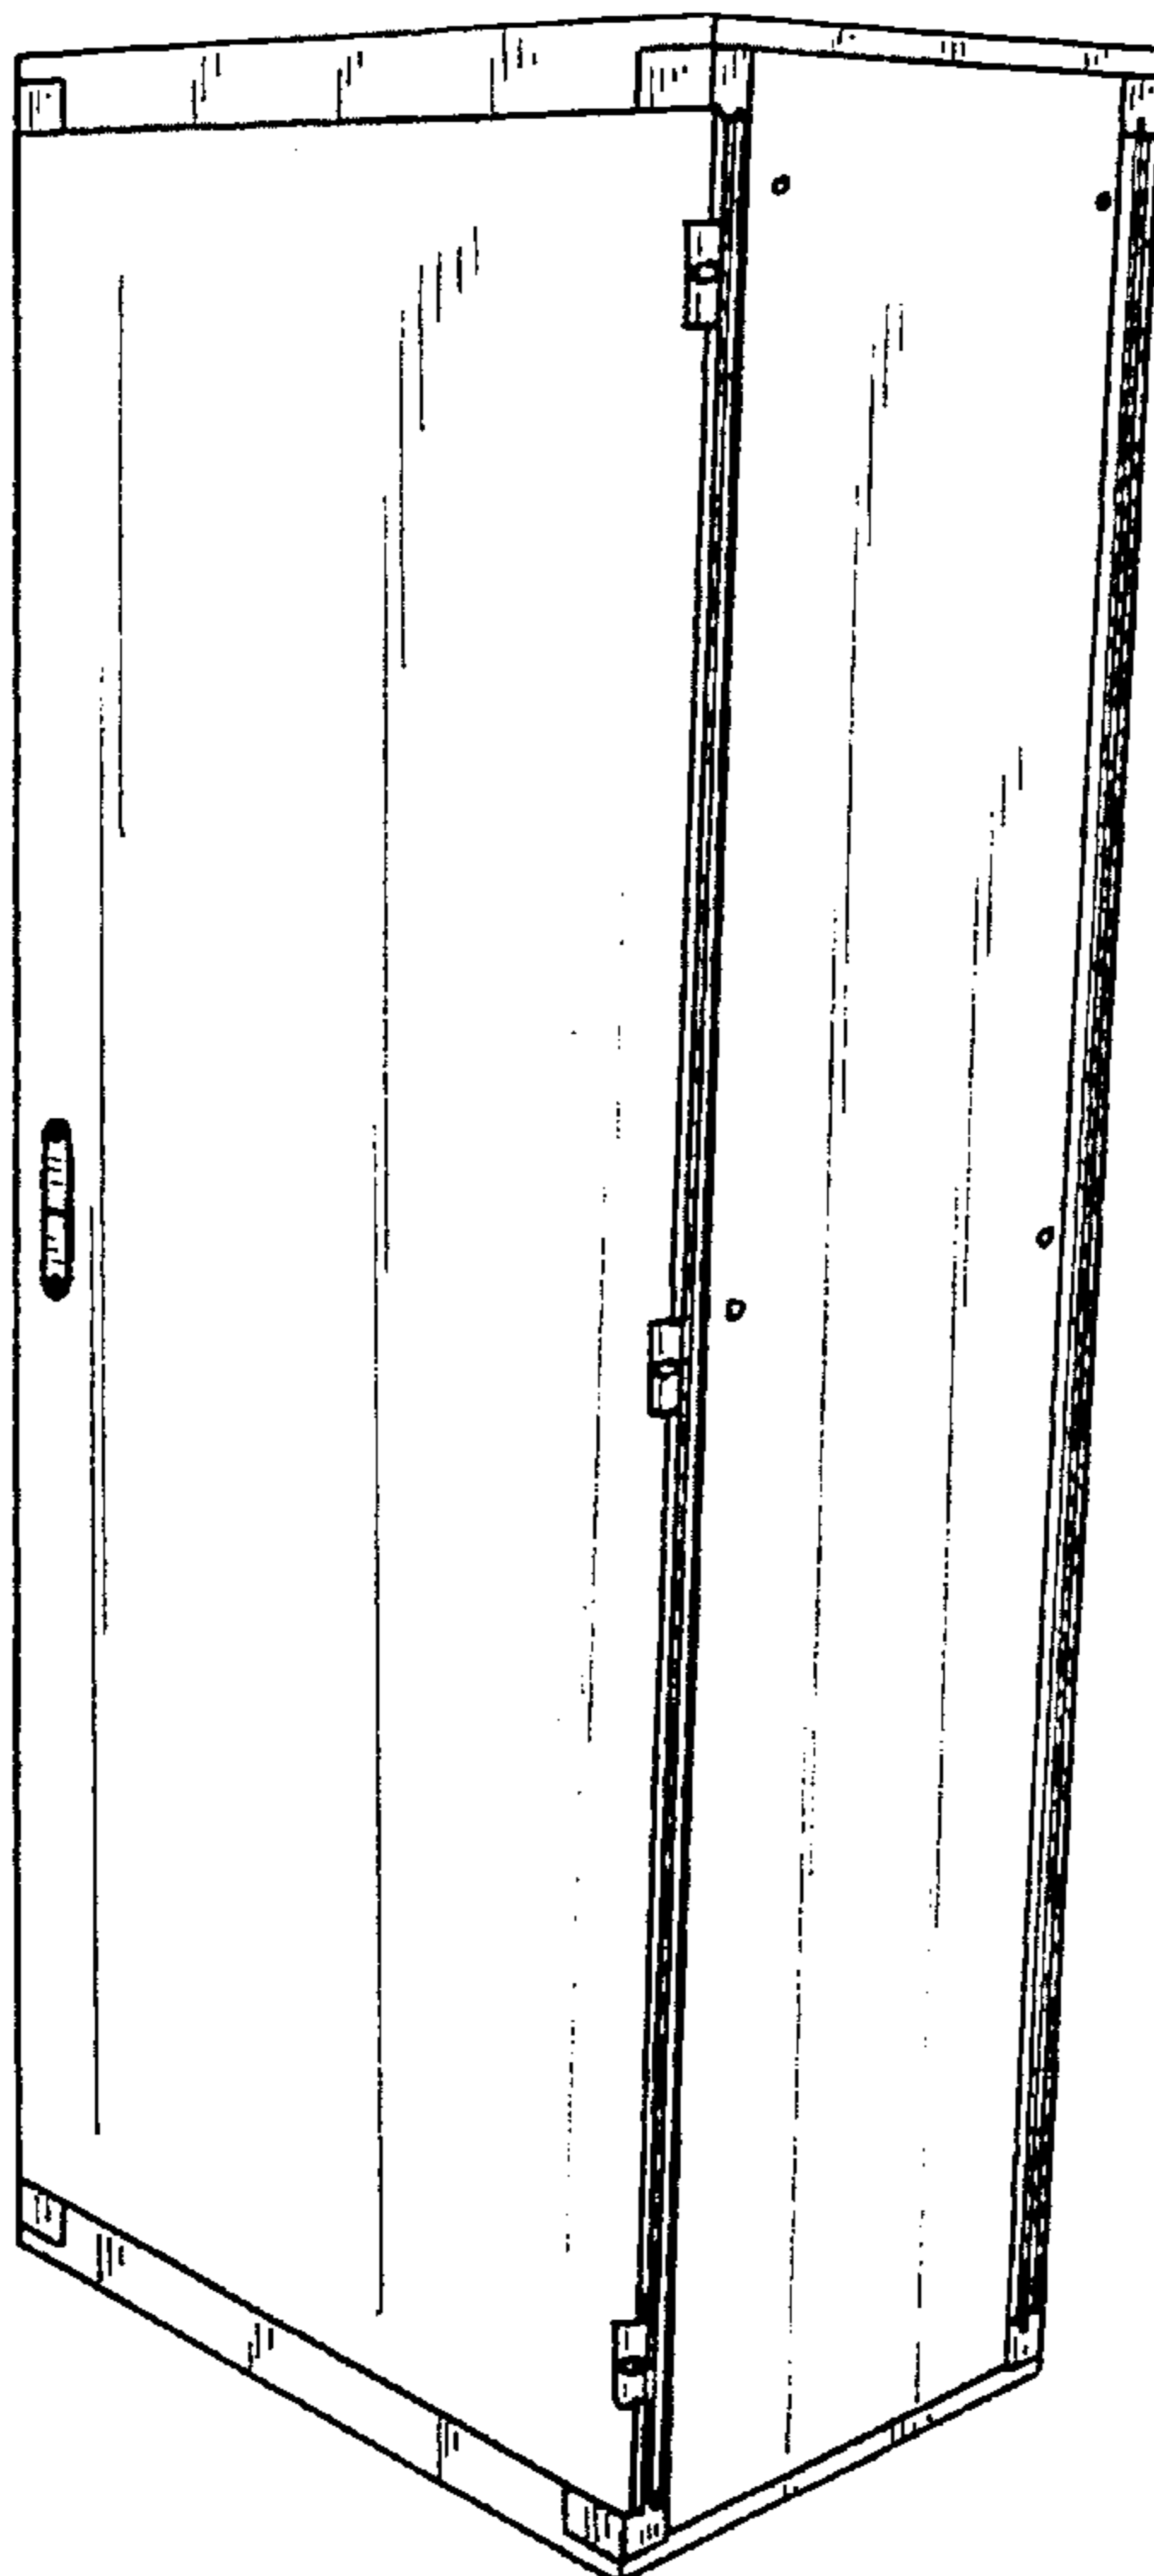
is a perspective view of a cabinet for electronic equipment, showing our new design;
